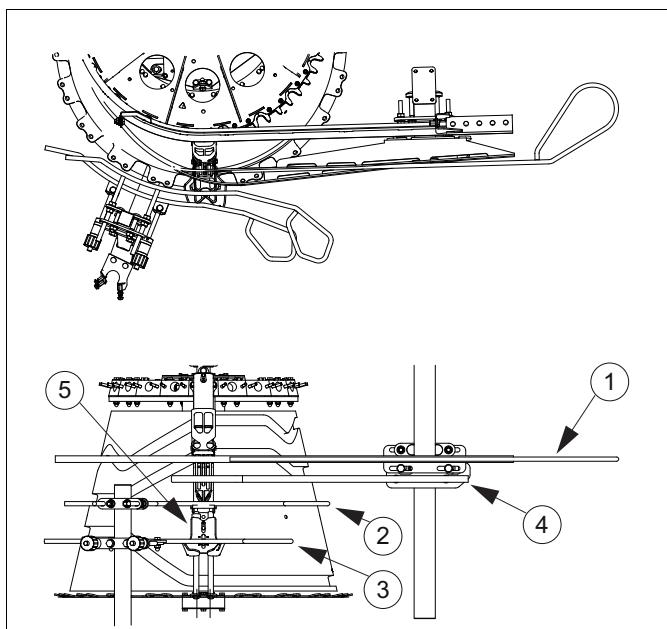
Adjust the FIM RotoVac 20 RS with Neck Skin Cutting Module inner shackle bump out guide
